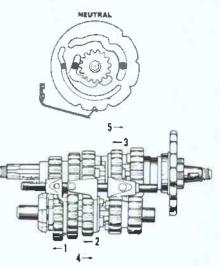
M4-51–Drawing of transmission showing positions of shift cam and shift forks in neutral.
